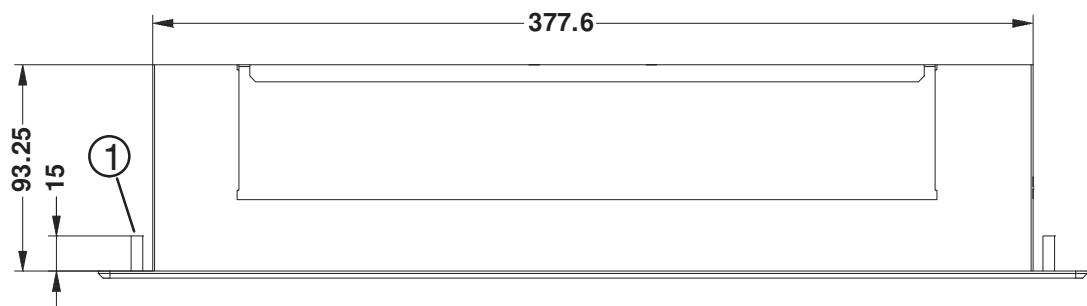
Unit depth, P15 front installation enclosure (all dimensions in mm)
